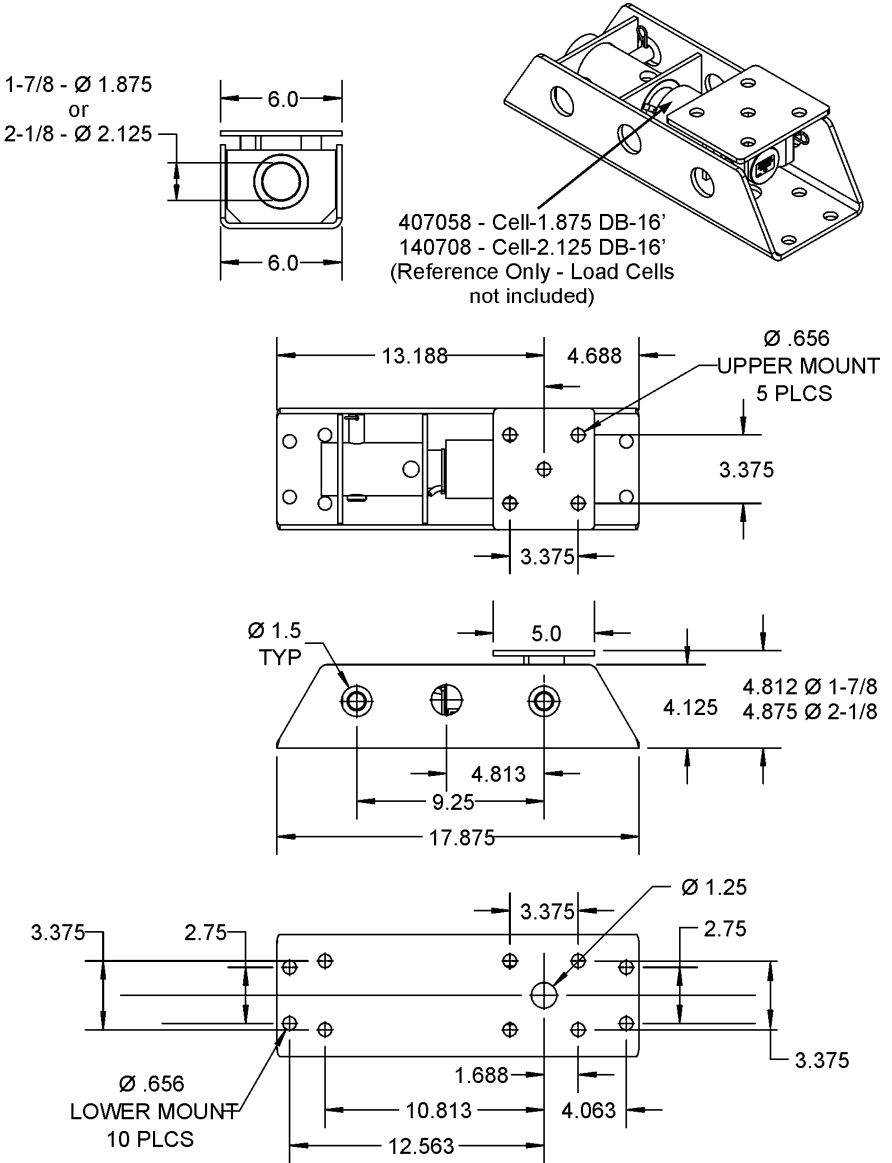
Dimensions – for 1-7/8 & 2-1/8 Diameter Mount
